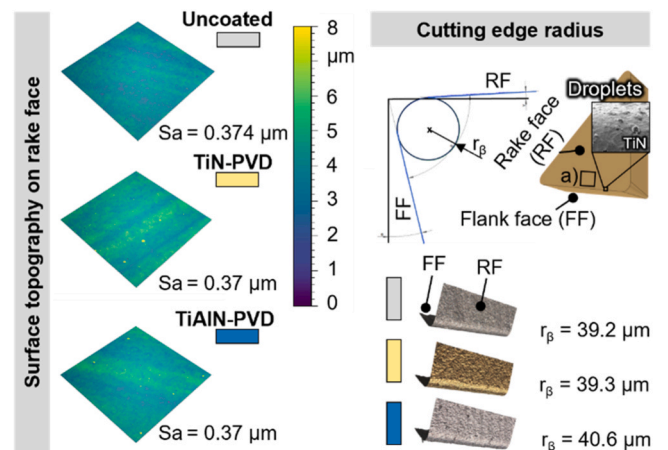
Experimental tools: Rake face of the tool (main body), serves as friction surface.
